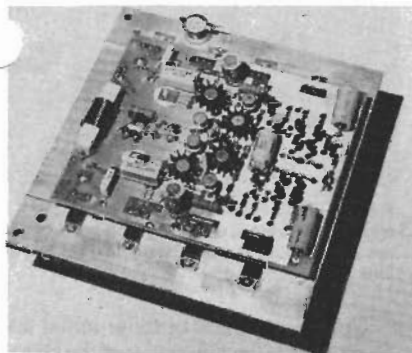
AMPLIFIER BOARD is shown here mounted on heat sink. Note that Q12, Q13, Q15, and Q18 use TO-5 type heat sinks.
